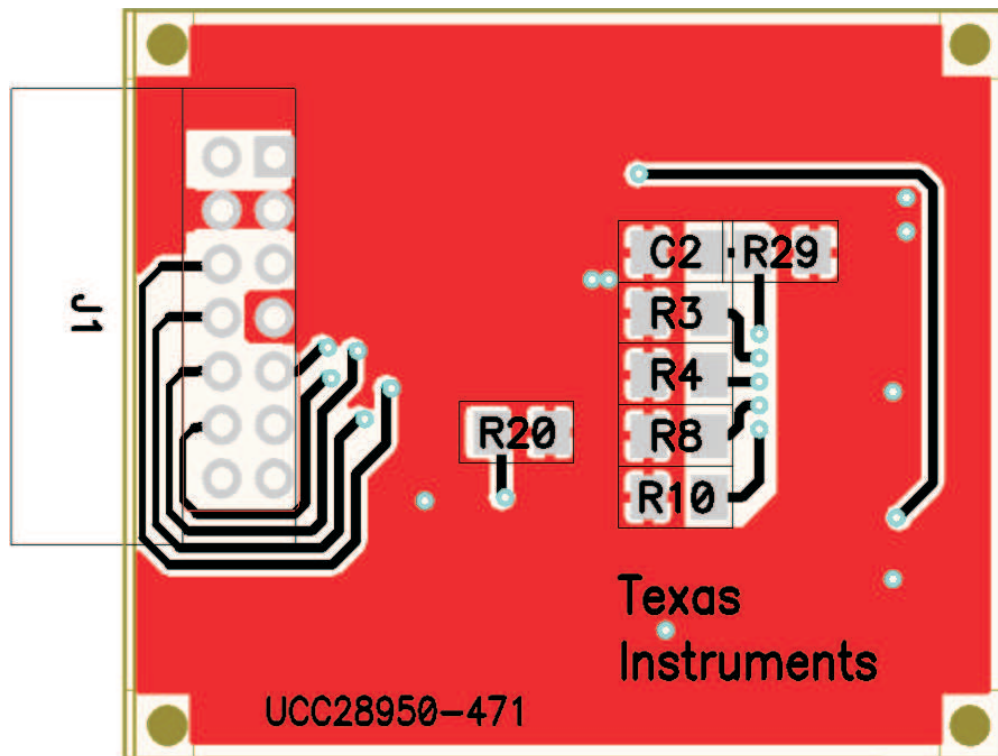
UCC28950EVM-442 Daughter Controller Card Bottom Layer Assembly Drawing (bottom view)
